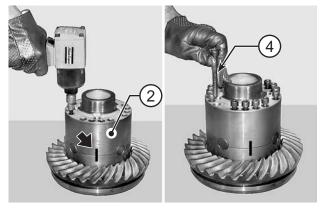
Make positional match marks on the half boxes of the differential gear (2); loosen and pull out joining screws (4).
